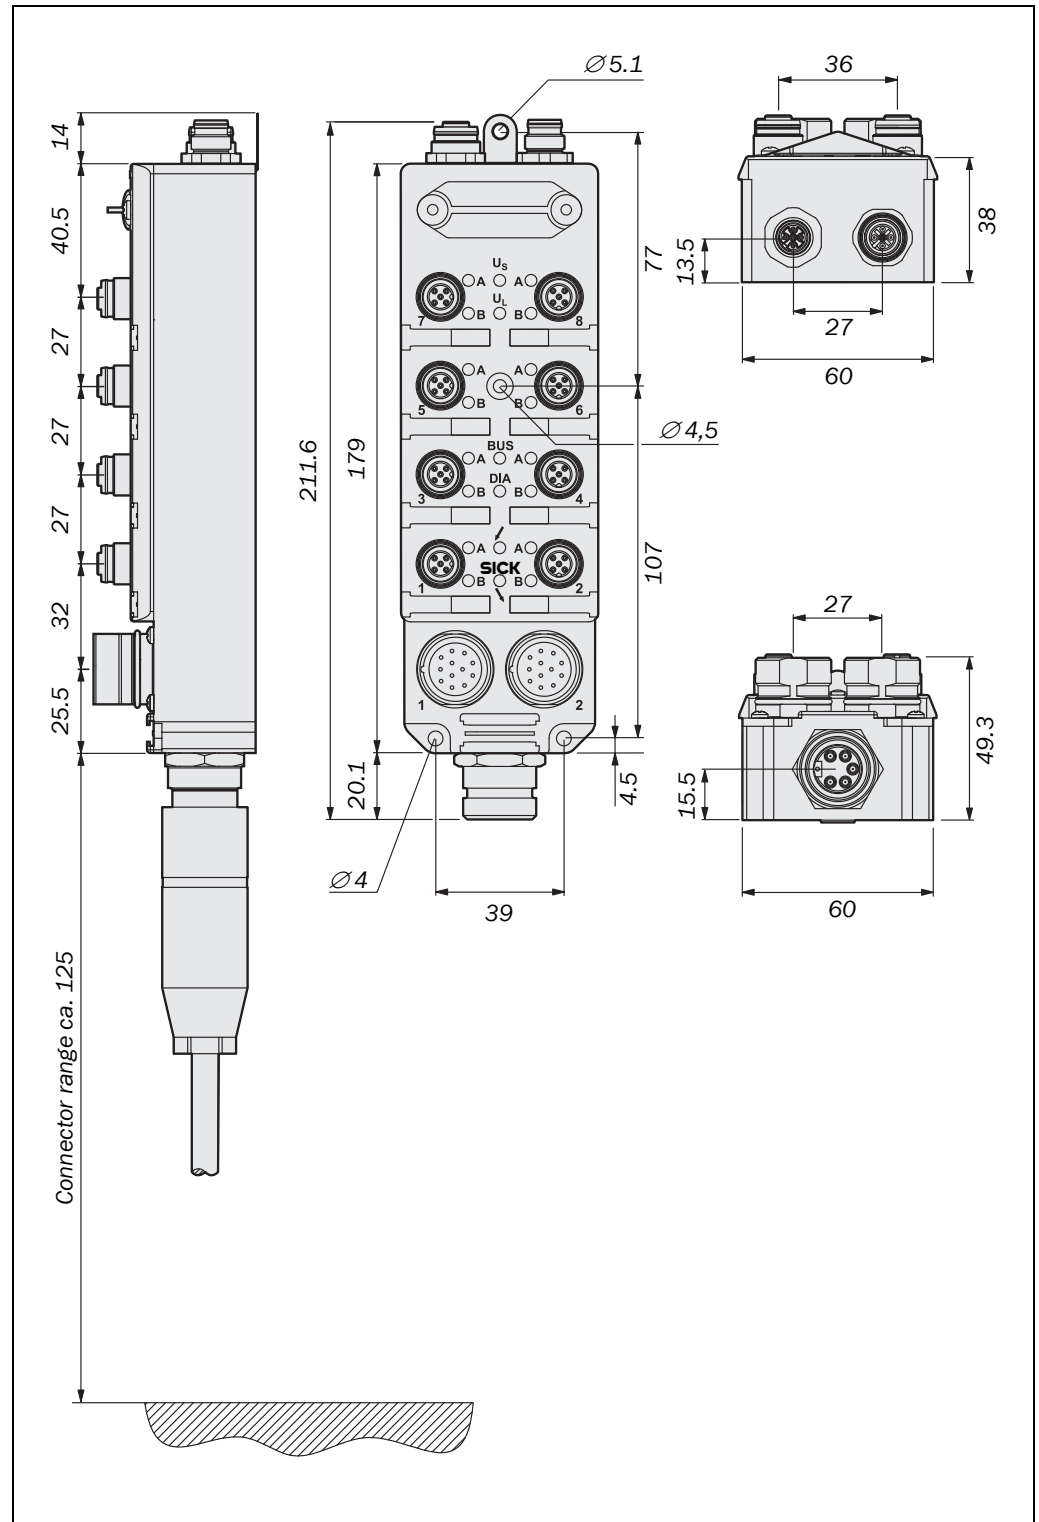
Dimensional drawing bus node UE 4120 (mm)
